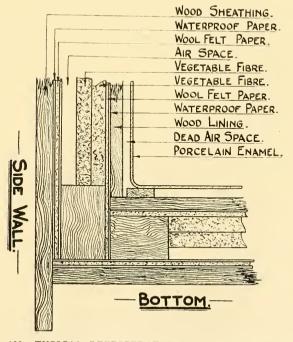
,-TYPICAL REFRIGERATOR WALL CONSTRUCTION
